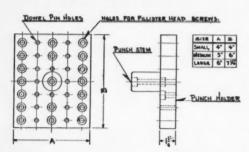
Punch holders used with the bender shoe pictured in Fig. 7.
